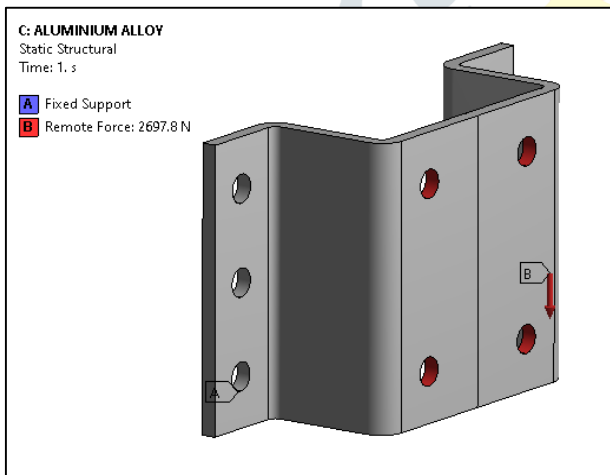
boundary condition of Aluminum Engine Mounting Bracket
